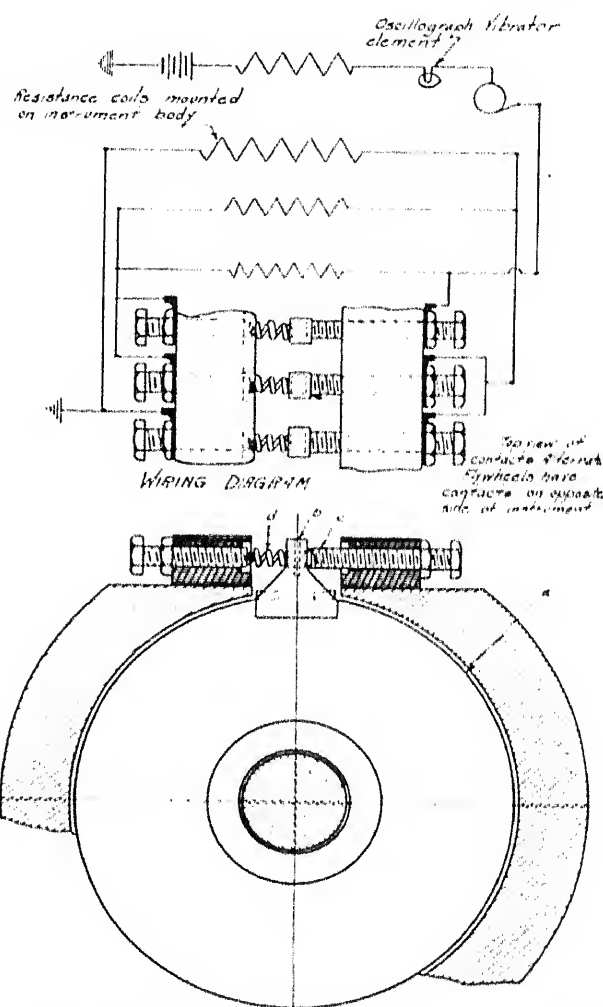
CROSS-SECTION SHOWING DISK FLYWHEEL AND CONTACT
